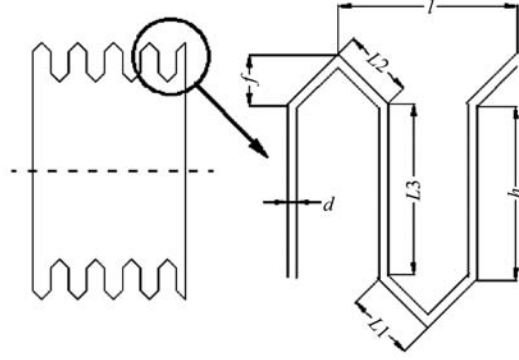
The cross section along the longitudinal direction of the edge welded bellows type vacuum chamber.
